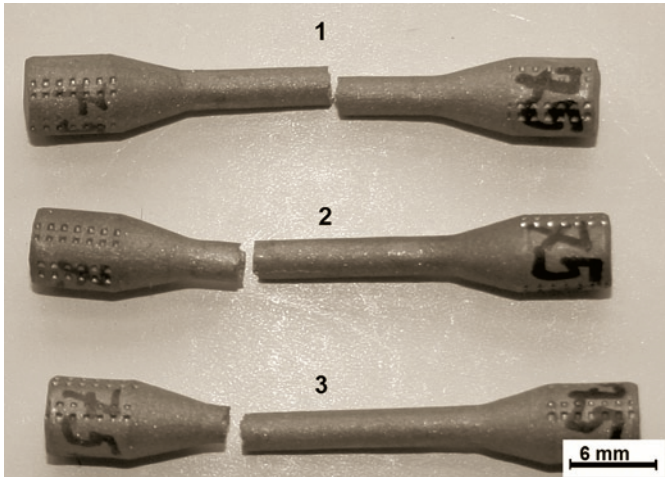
Samples after a static tensile test: 1 – a fracture on the measuring length; 2, 3 – fractures out of measuring length
